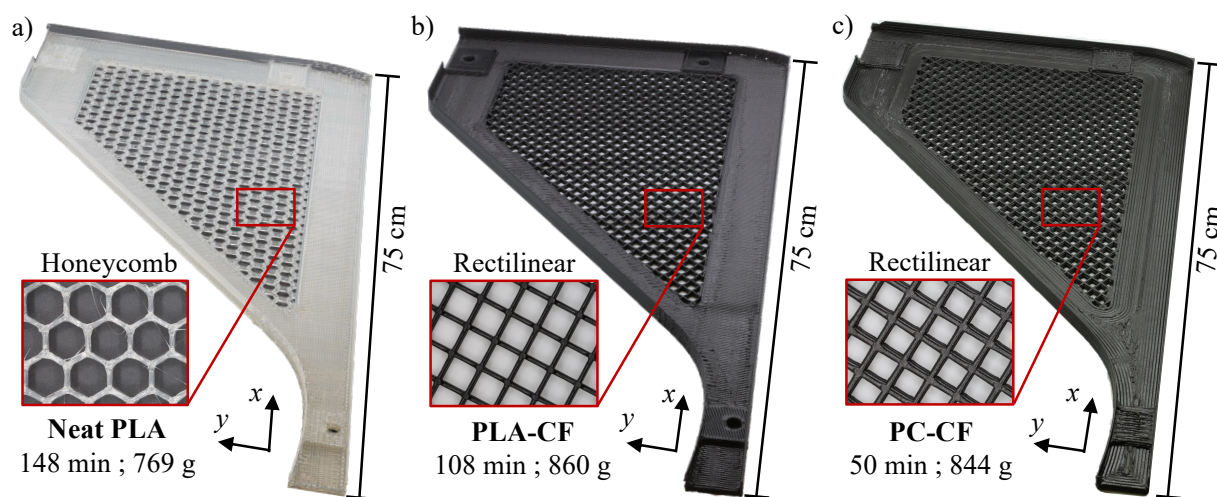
Aircraft cabin interior cosmetic component fabricated using different materials and infill strategies: (a) PLA component printed using a honeycomb infill; (b) PLA-CF component printed using a rectilinear infill; and (c) PC-CF component printed using a rectilinear infill at a peak volumetric flow rate of 350 mm³/s.
